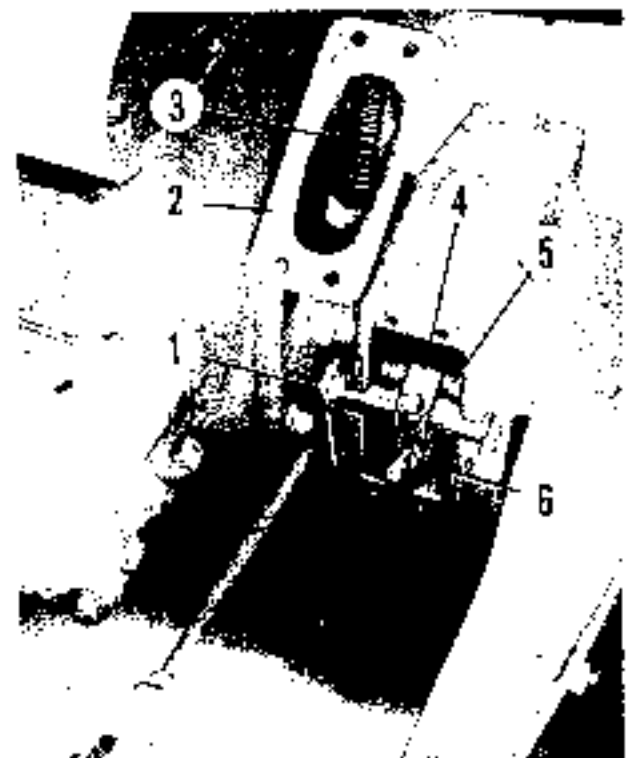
Adjusting Pony brakes. Adjust pedal rod to equalize height of pedals. Turn adjusting nut (6) on brake band to adjust lining clearance.
